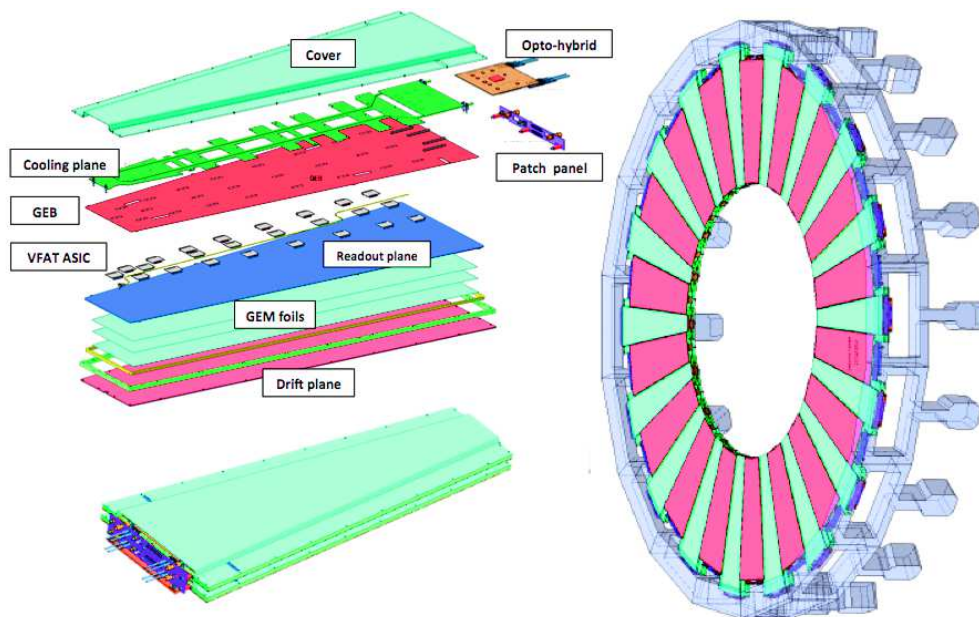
Top left: exploded view of a GE1/1 chamber showing the electrodes layout, the electronics and the cooling plane and the protection cover. Bottom left: Assembled super chamber. Right: Mechanical drawings of the GE1/1 station with both long and short chambers.
